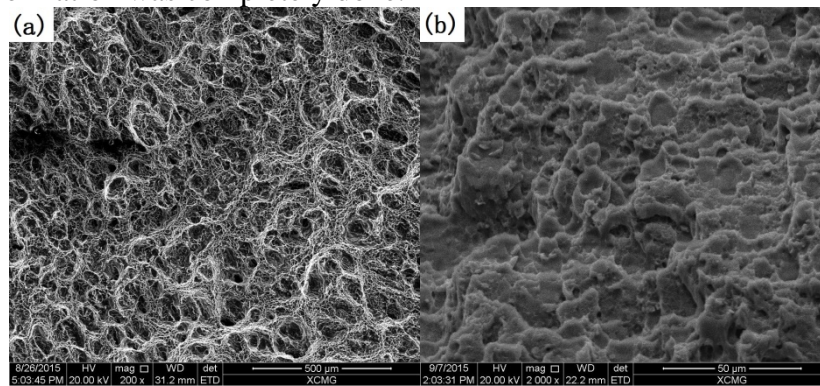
SEM images of tensile fracture sample in 7005Al alloy joint (a) and base metal (b)
